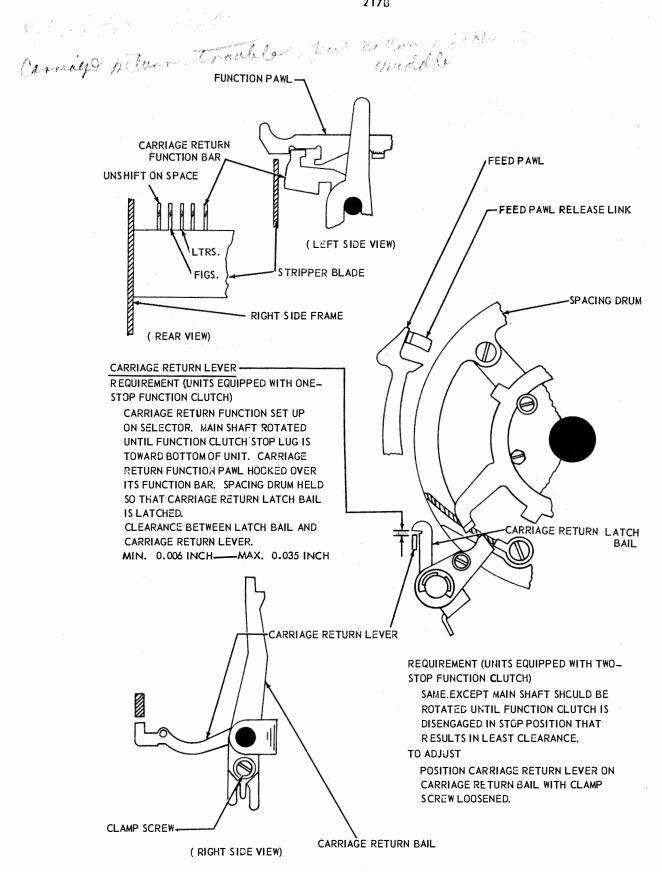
TYPING UNIT, CARRIAGE RETURN MECHANISM
